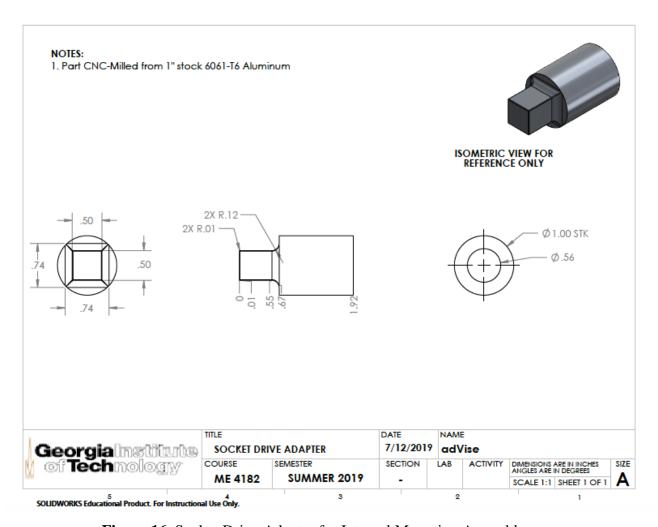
Socket Drive Adapter for Internal Mounting Assembly.
